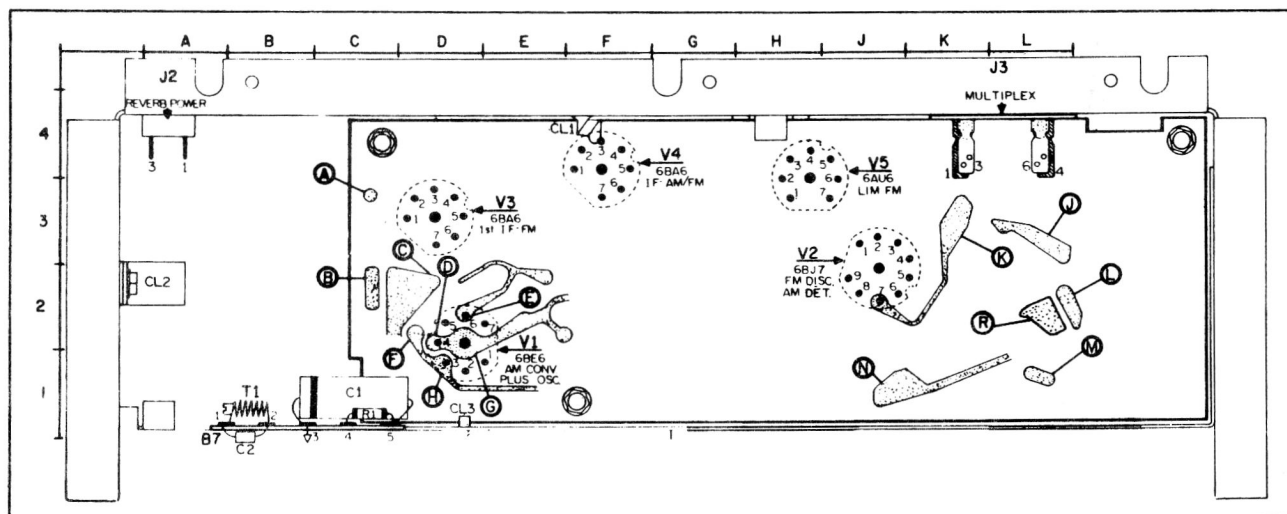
Bottom View of Tuner Layout Showing Wiring Locations
